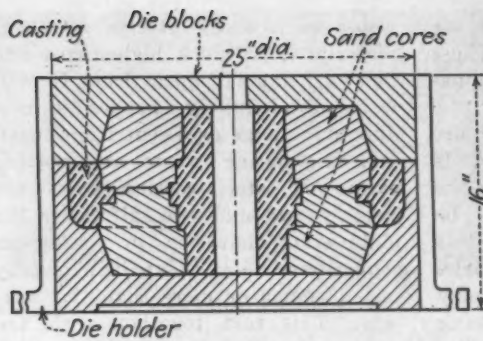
Layout for an aluminum bronze worm gear blank cast to shape.
